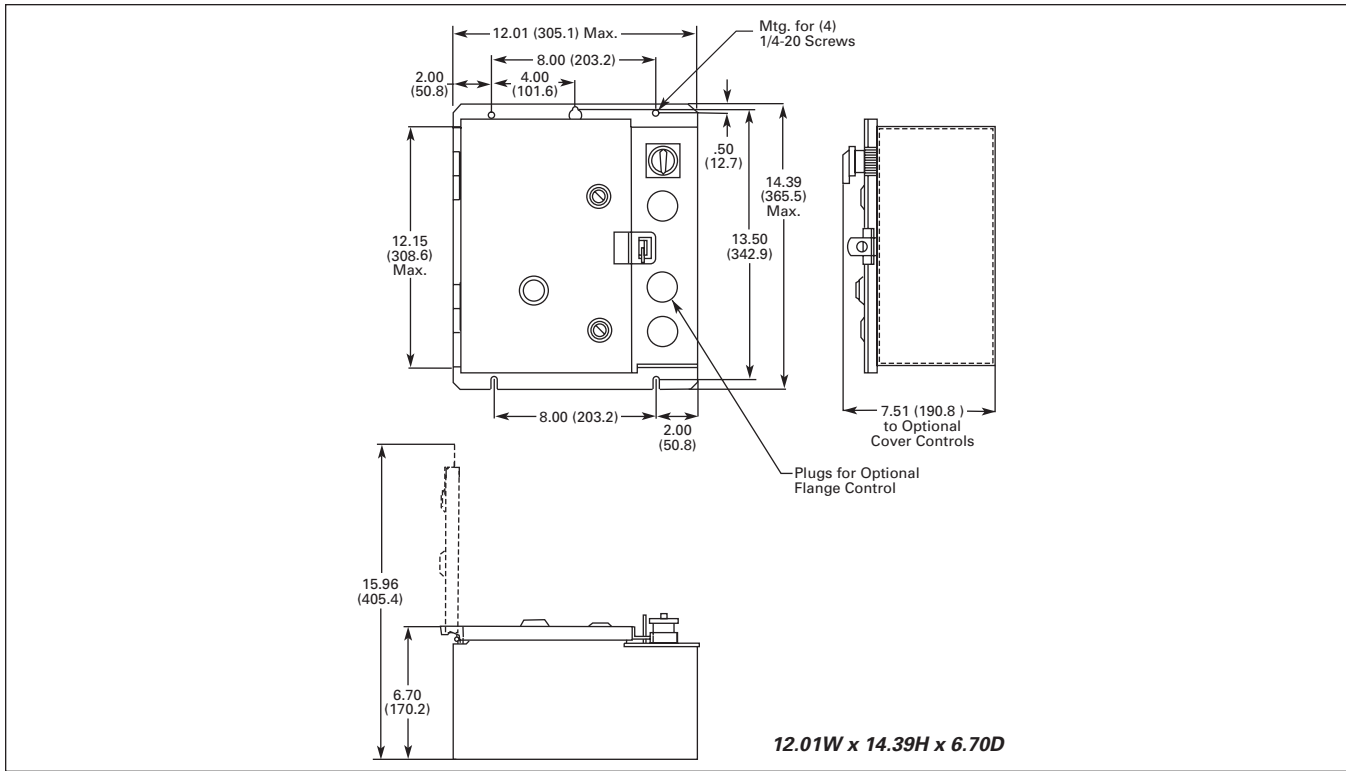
Box 6, Type 12 — Approximate Dimensions in Inches (mm)
